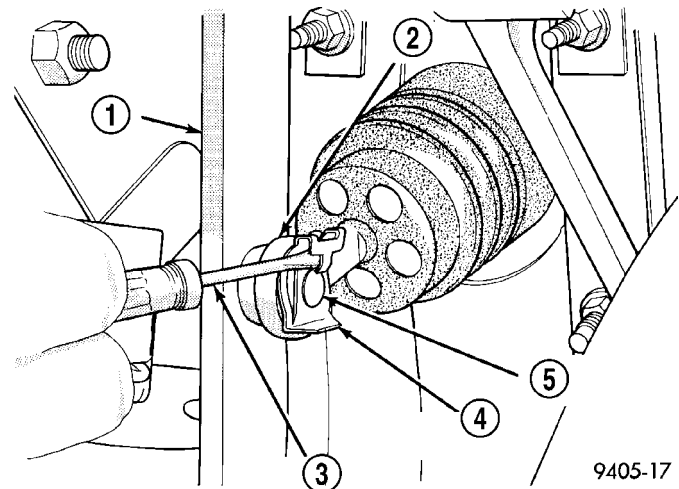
Booster Input Rod Pin Retaining Clip (Typical)
